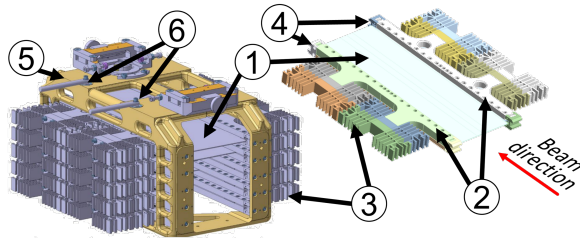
T4 full target assembly (left), one layer (right): 1. Be plates, 2. Al supports, 3. Al cooling fins, 4. end pieces, 5. chassis, 6. guide pins.
